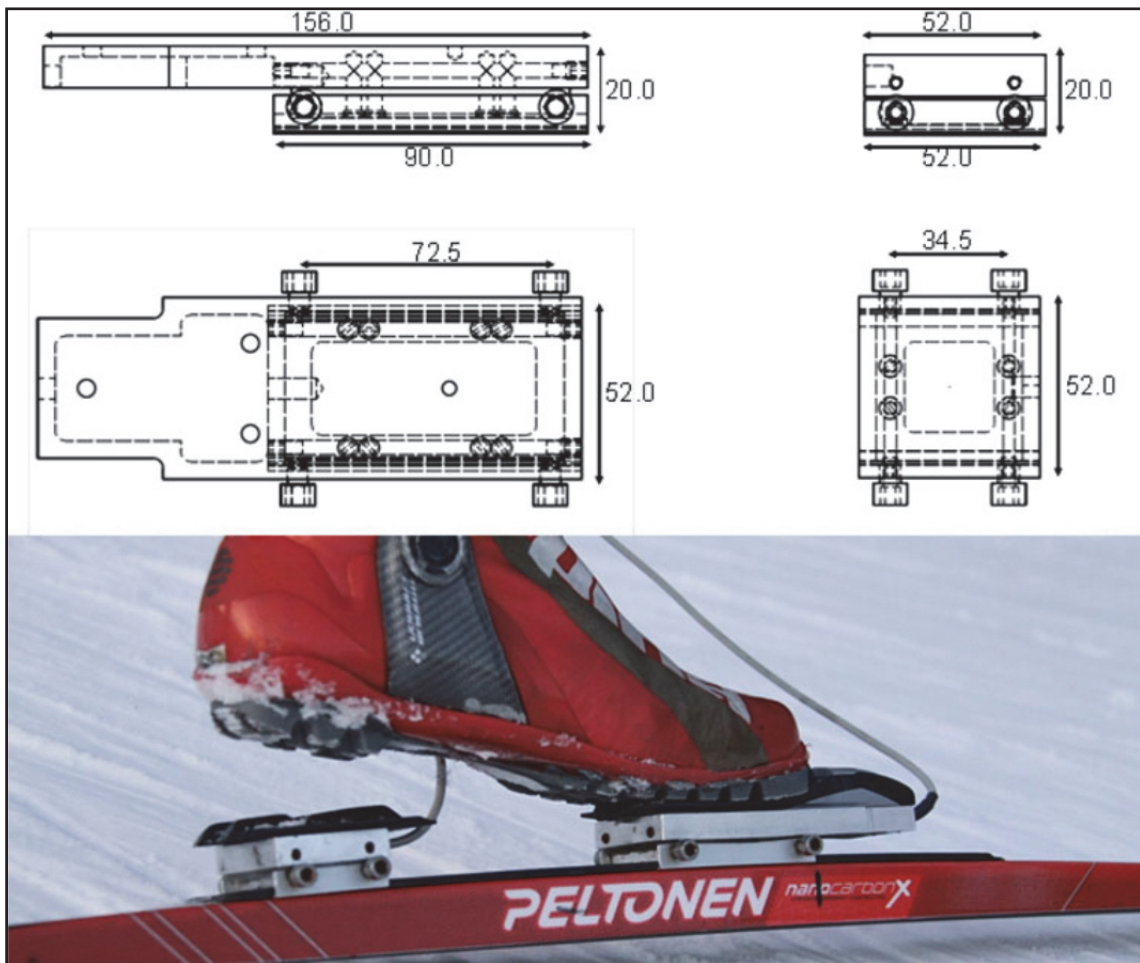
A new force binding developed in experiment II with schematic drawing including the dimensions in millimetres.
